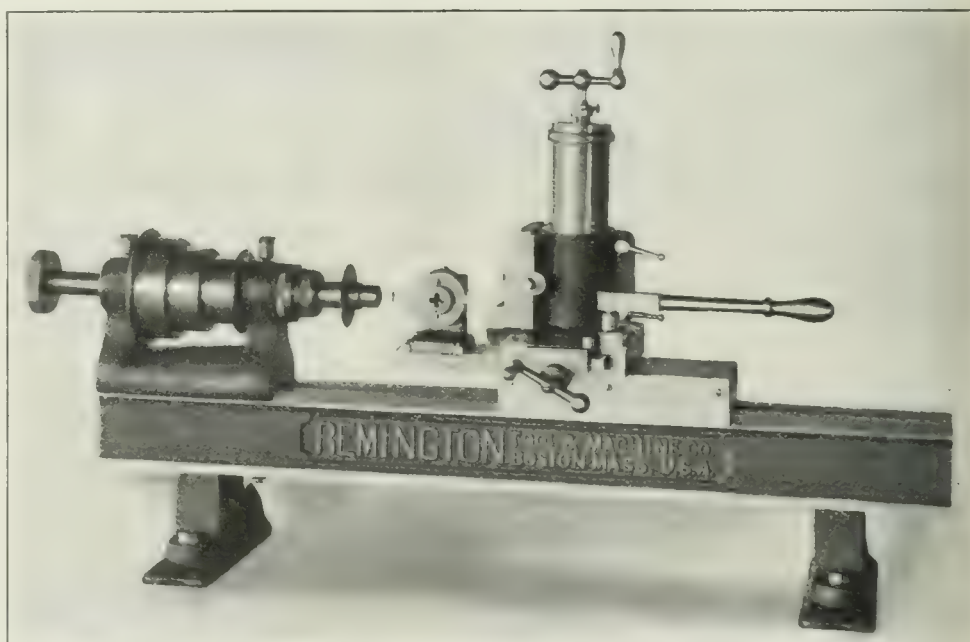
The Lathe Equipped with Lever and Screw Milling Attachment Feeds.
